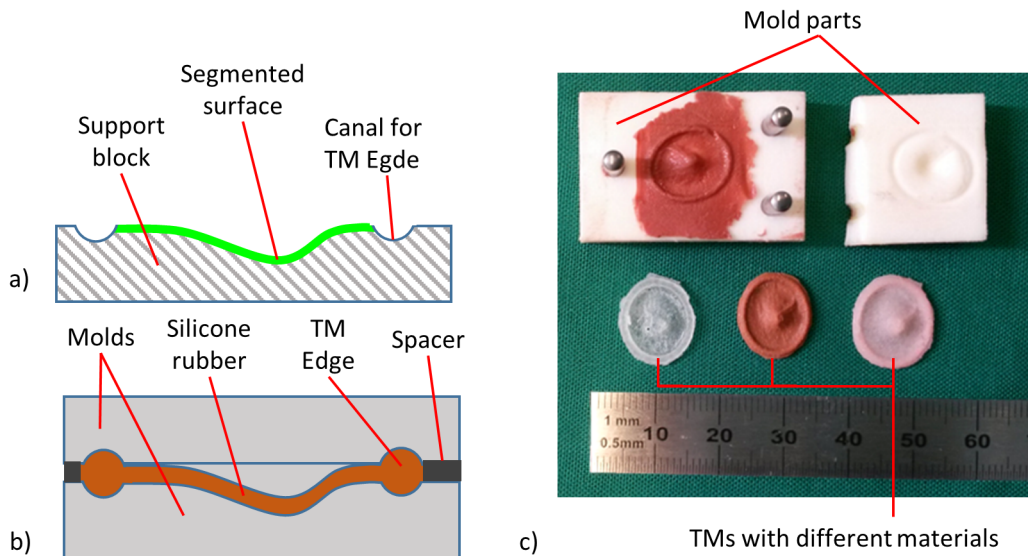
a) The shape of the mold parts were created by segmenting the TM's surface and supporting it with a block. b) The mold parts were kept apart by a spacer and filled with silicone rubber mixture to manufacture the TM. c) 3D printed mold parts right after the silicone rubber casting and casted TMs with different materials.
